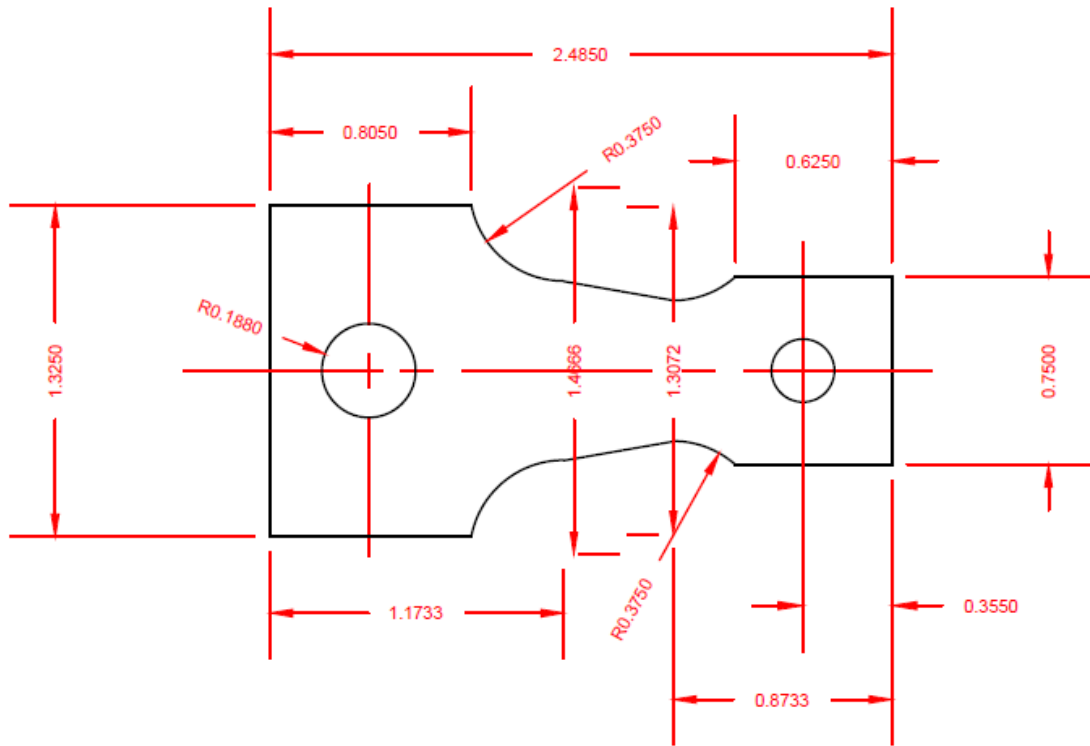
Sketch of specimen type-2 (all dimensions are in inches).
